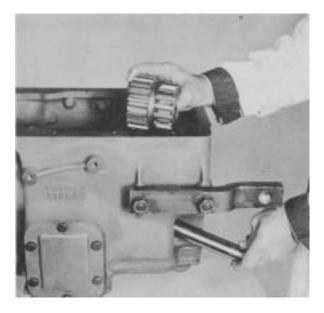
Remove reverse idler gear, bearings, and two thrust washers.
